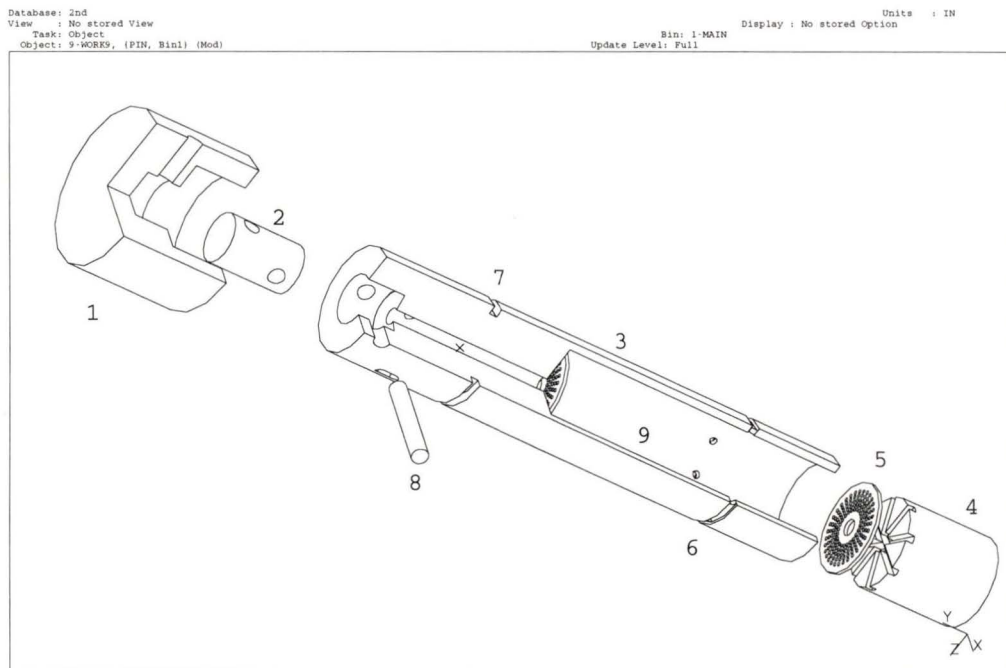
Exploded view of the displacer assembly; connecting pin to drive mechanism (1), first-stage regenerator container, regenerator space (3), first-stage end plug (4), stainless steel pins (5, 9), universal joint (6), second-stage regenerator container (7), second-stage end plug (8).
